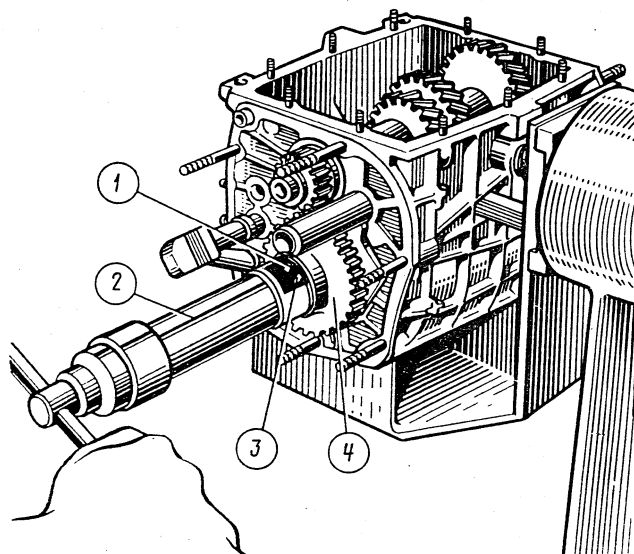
Installing the Reverse Speed Gear Locking Ring on Main Shaft
